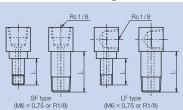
Grease fitting and tube fitting Standard lubrication accessory is B type.
